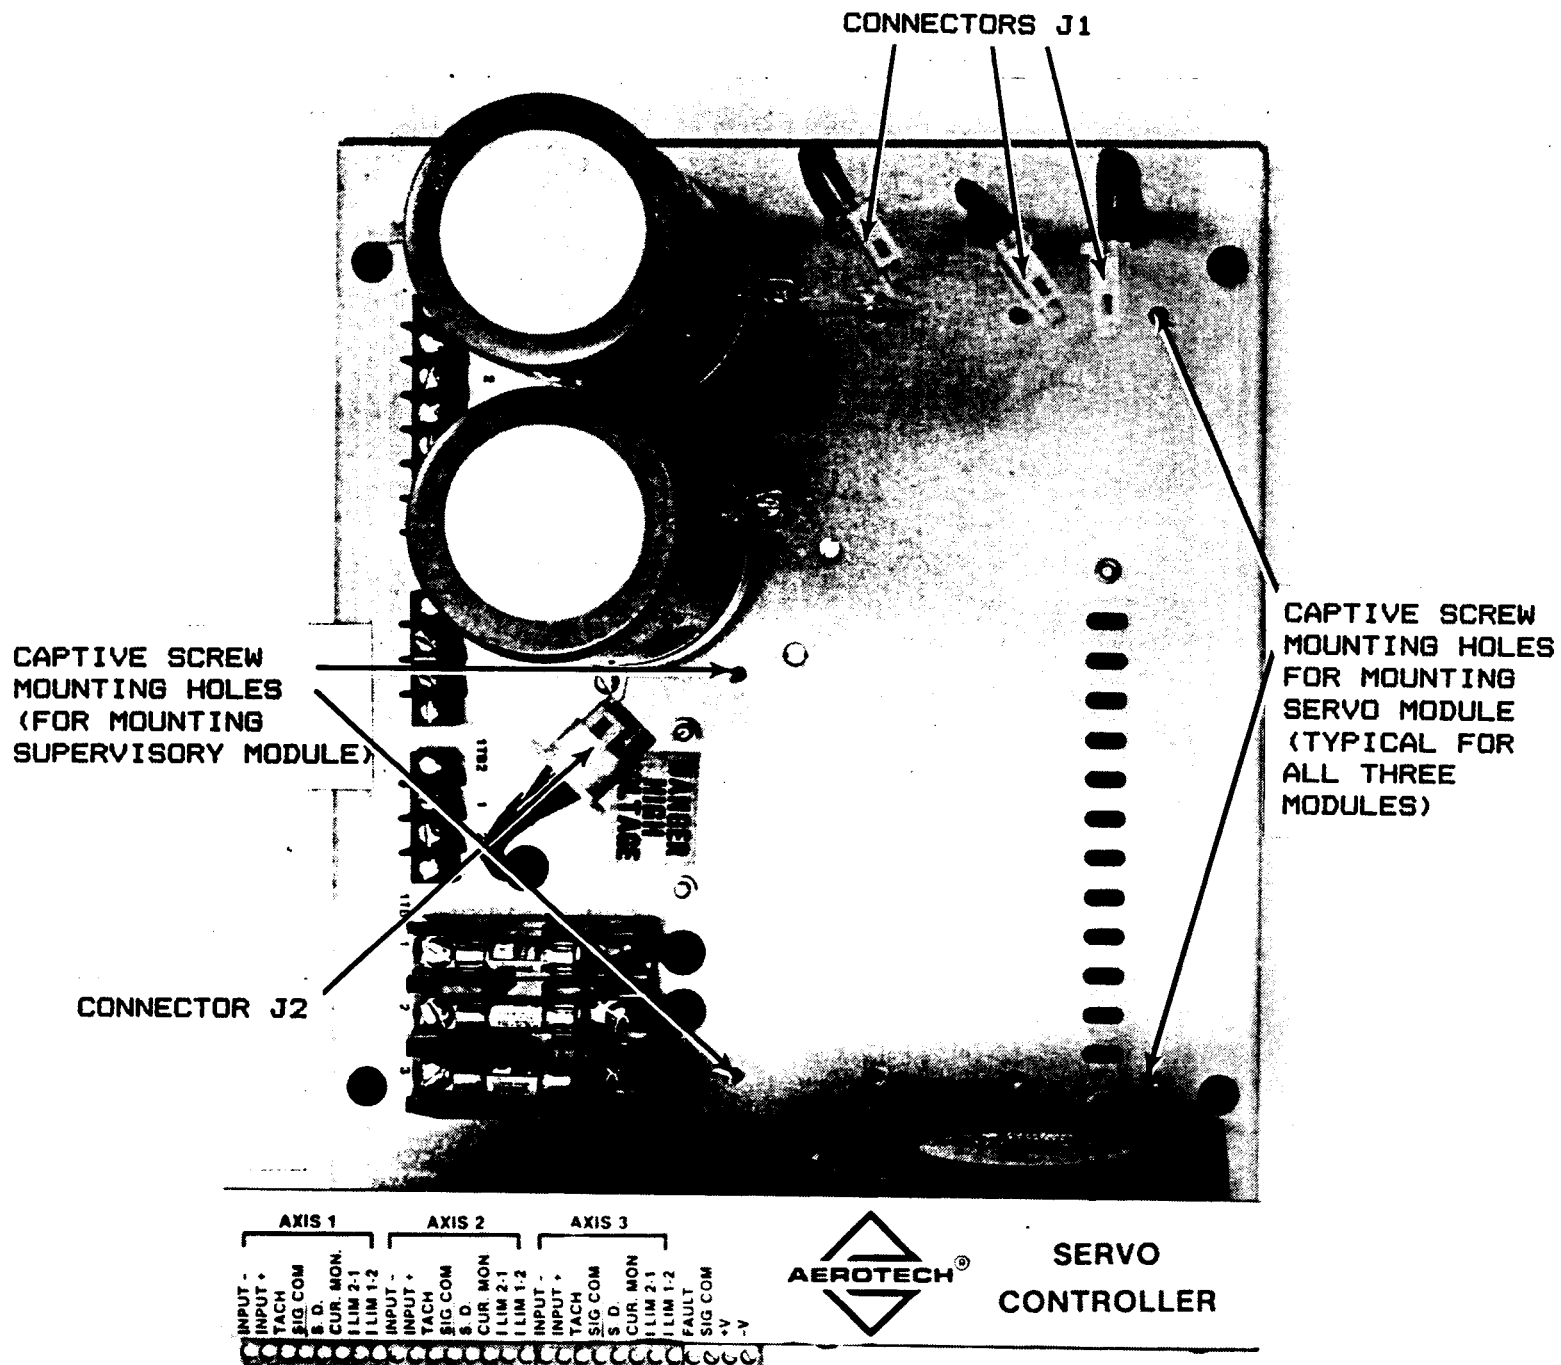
LOCATION OF HOLES FOR MOUNTING MODULES TO BASE PLATE
